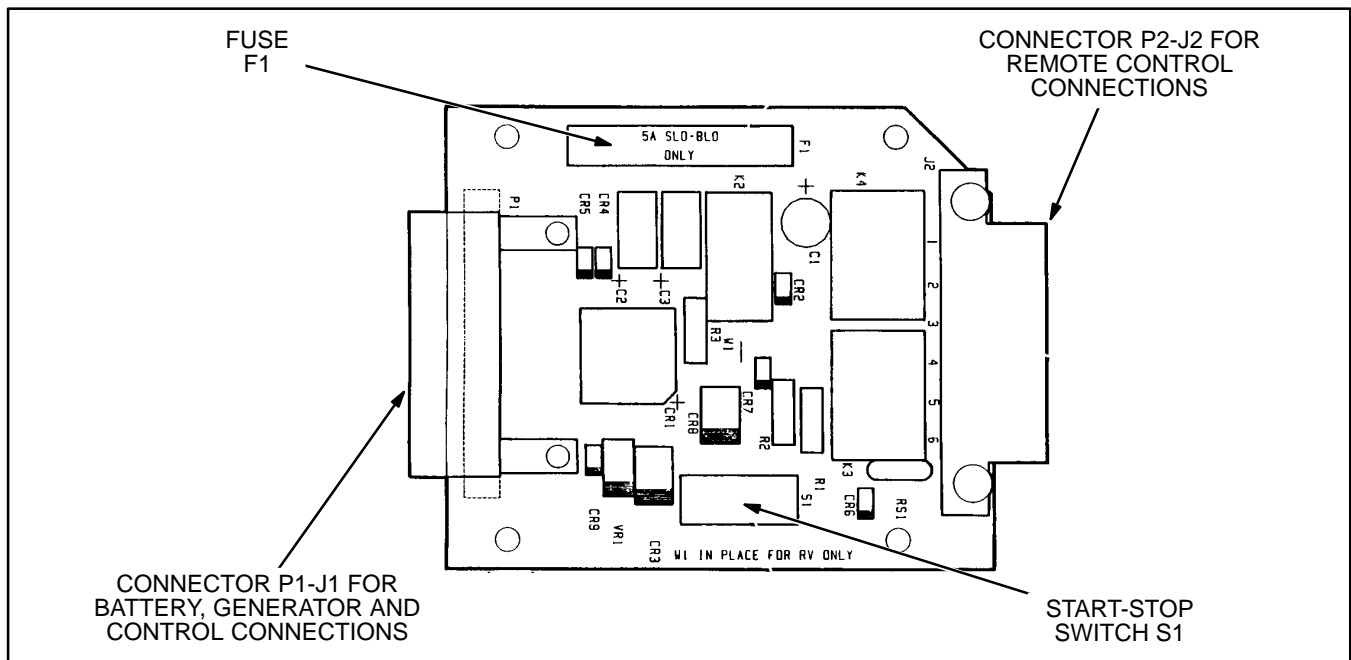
CONTROL BOARD A1 (SPEC H ONLY)
